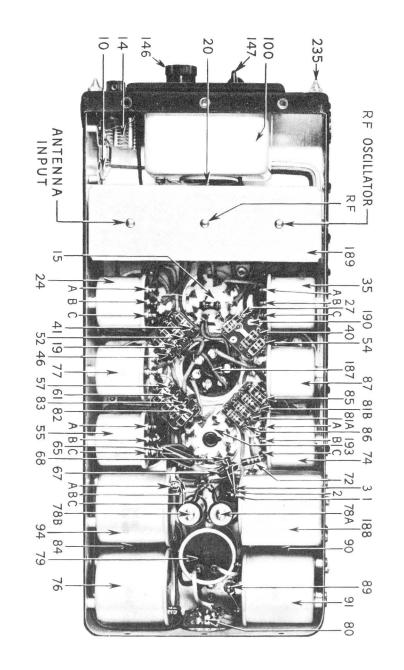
Typical Receiver Unit, Bottom View, Inside
